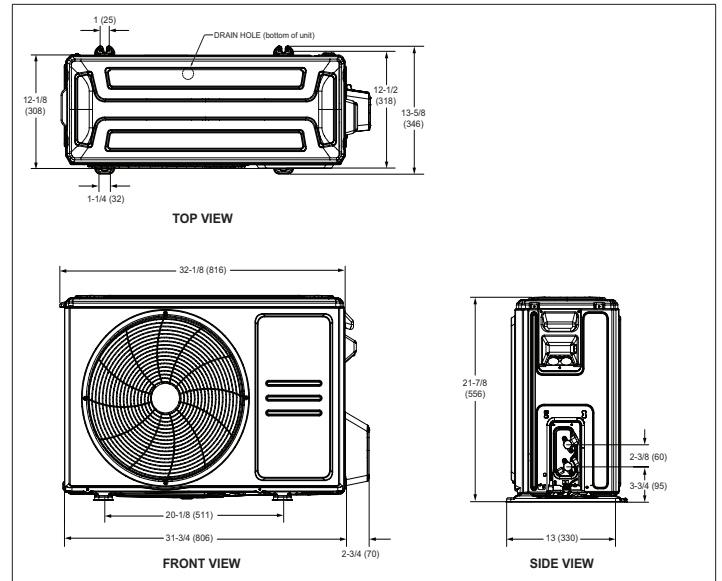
124K Outdoor Unit Dimensions - Inches (mm)
